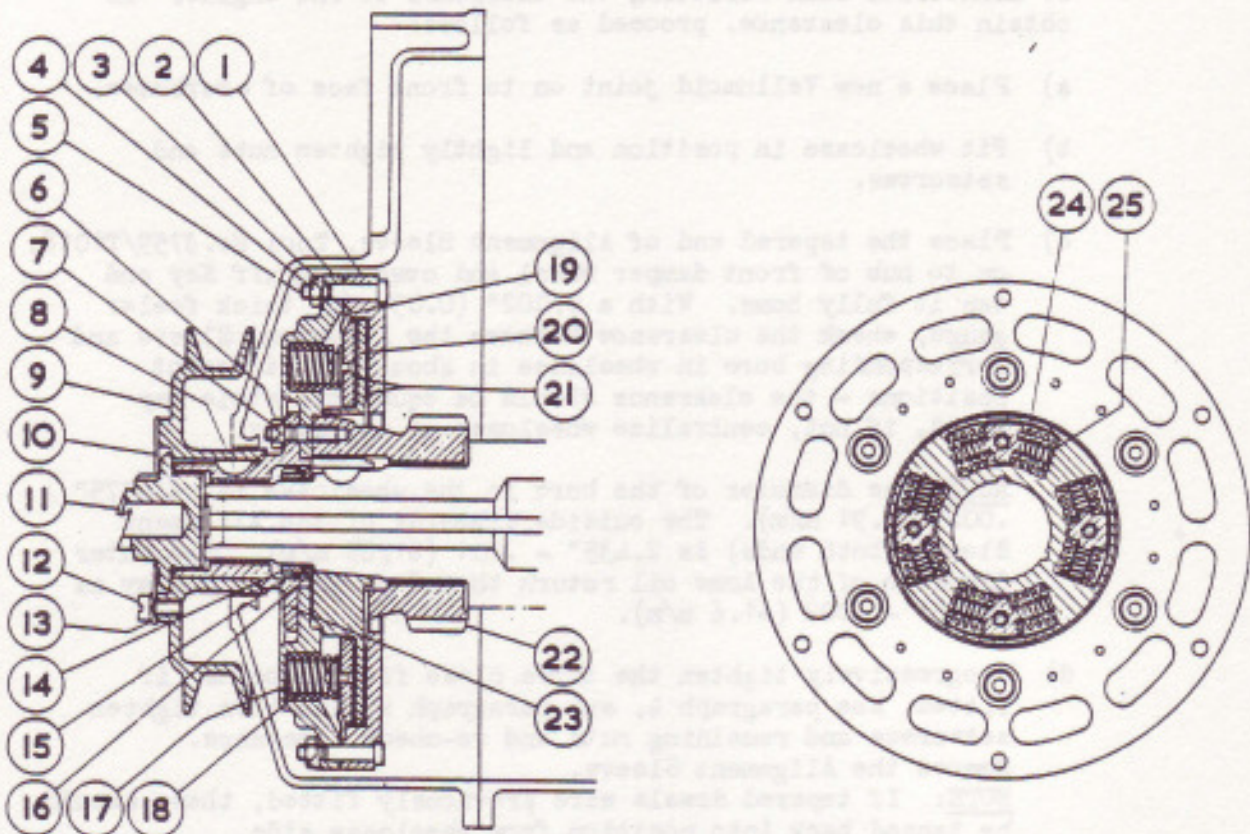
SECTION - SPRING DRIVE ("BENCH" TYPE).
